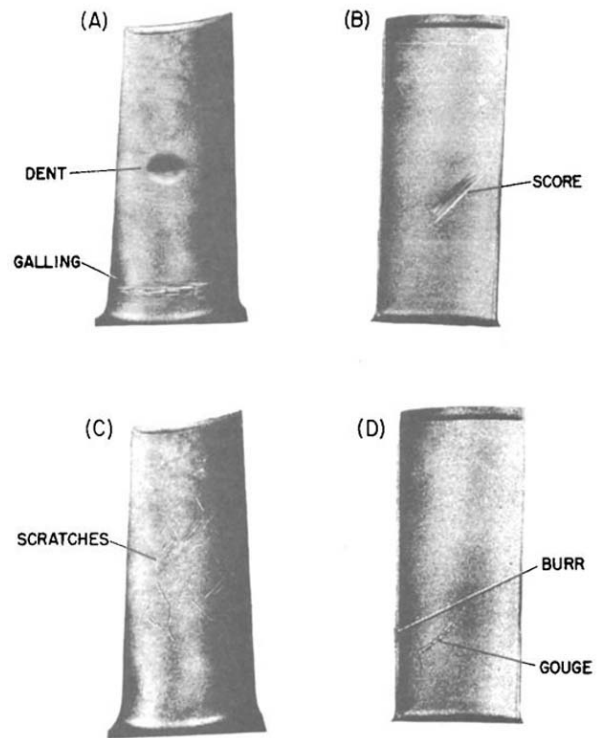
(A) Blade showing dent and galling; (B) blade showing a score; (C) blade showing scratches; (D) blade showing gouge and burr.
